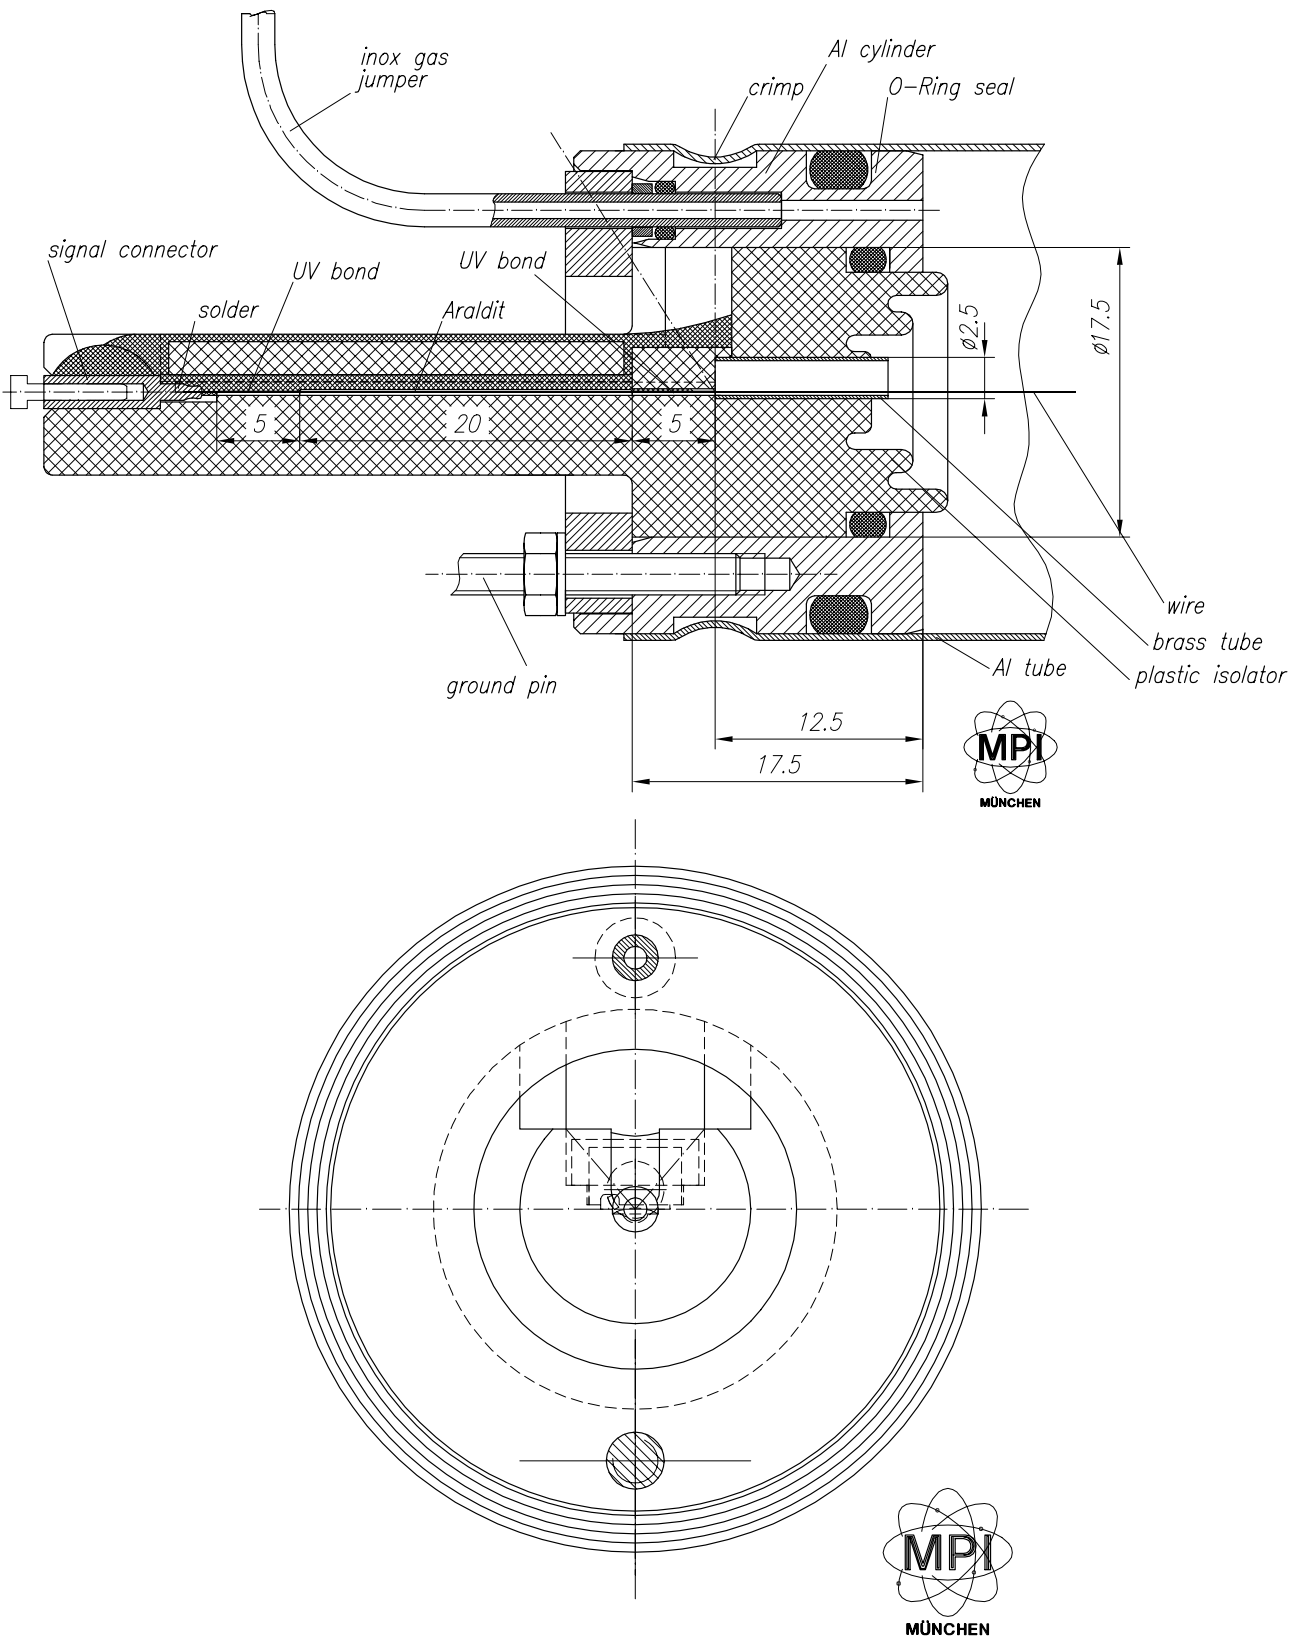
Drawings of the endplug for the tubes of the BOS prototype chamber: longitudinal cross section and front view.
